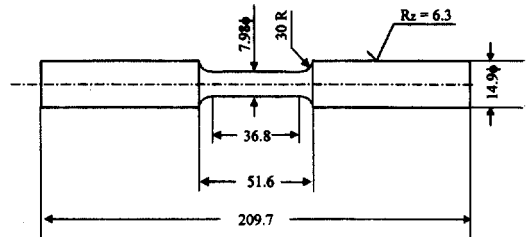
The dimension of fatigue test specimen. (maximum roughness;Rz=6.3 μ m)
